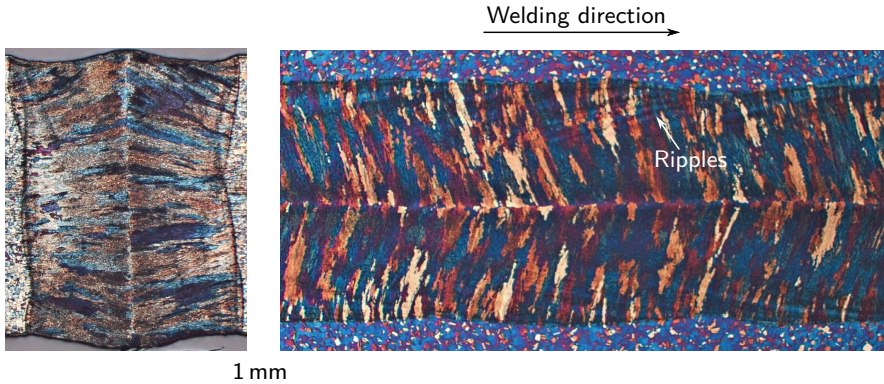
(left) Metallographic cross-section of the 2 mm thick 316L steel sheets, extracted at the middle of the weld seam; (right) horizontal section extracted from slightly below the top surface
